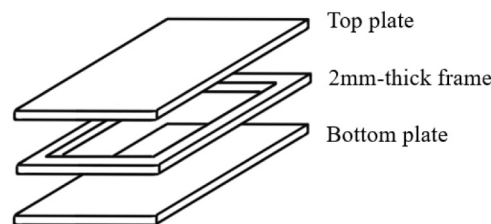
Schematic of frame and plates used for compression-moulding manufacturing.
